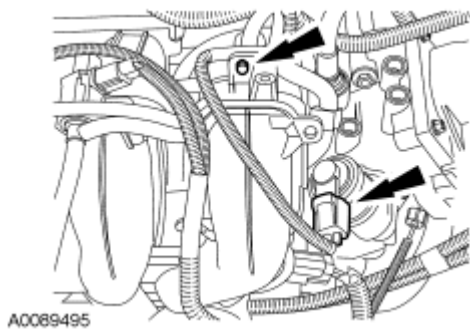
Locating Idle Air Control Valve Electrical Connector And Wiring Harness Pin-Type Retainer
